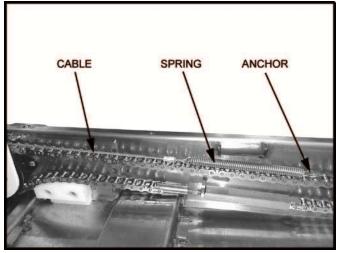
FRONT GATE CABLE, SPRING AND ANCHOR (LH SIDE SHOWN)
